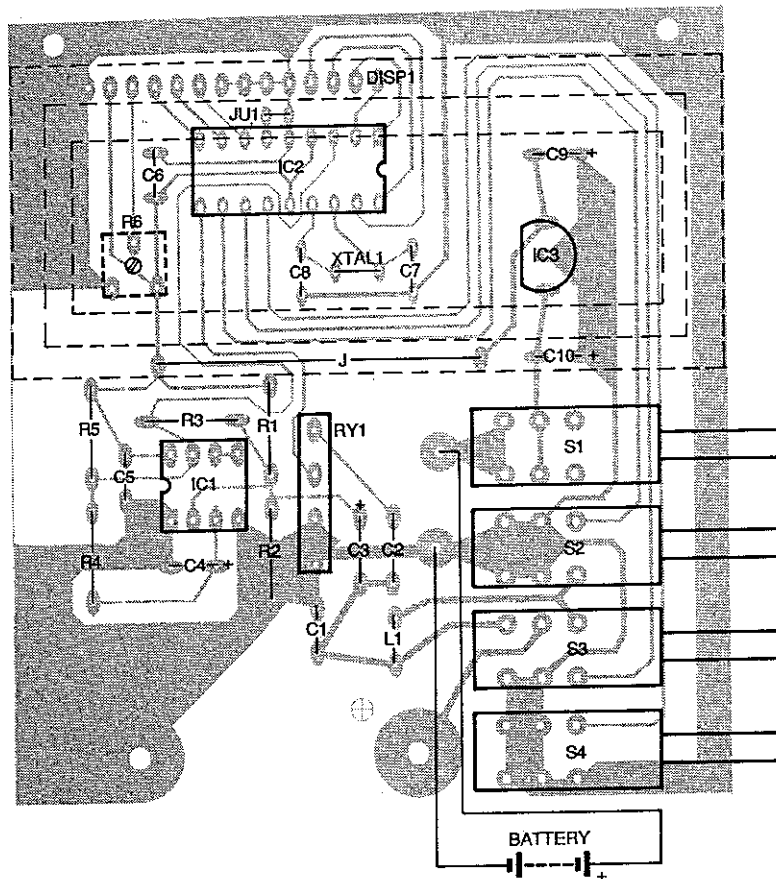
PARTS PLACEMENT DIAGRAM. Be sure to mount R6 on the rear of the board so you can adjust the display's contrast after the display is installed.
